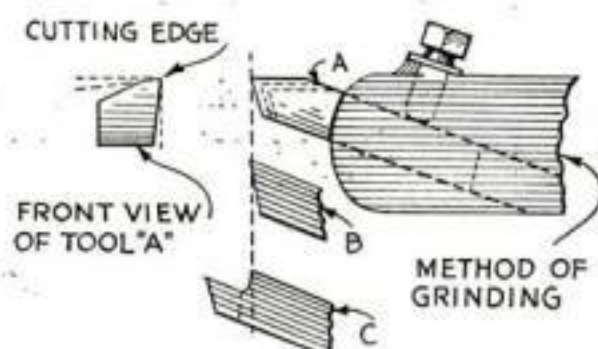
How a left-handed tool bit should be shaped for rough turning is shown at A.
